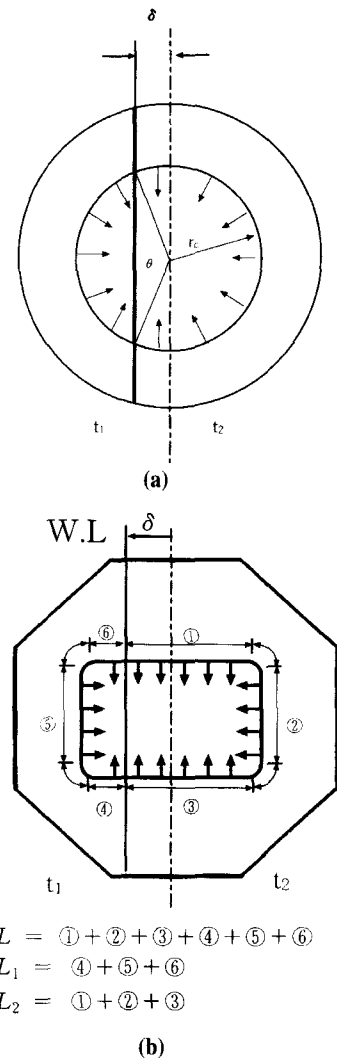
Determination of the initial shift δ of weld line under an equal BHF in (a) cylindrical cup drawing (b) rectangular cup drawing
